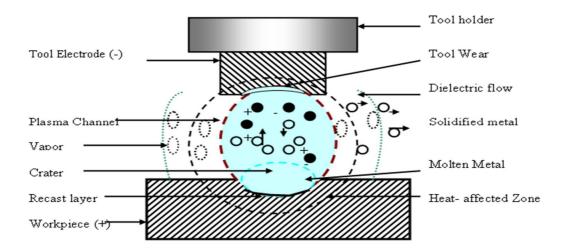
B Die-Sinking Electrical Discharge Machining
